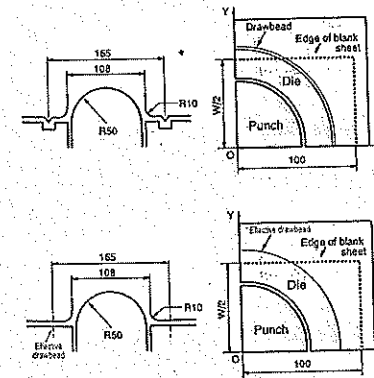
Geometry of stamping tools showing real and effective drawbeads
